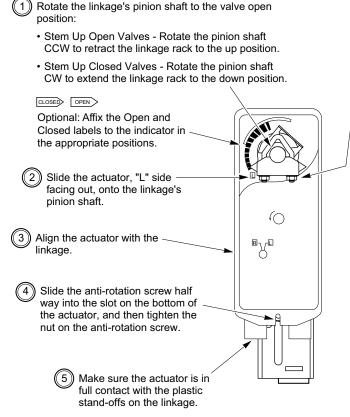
Mounting MX41-707X or MX41-715X and Setting up Actuator/Linkage/Valve Assembly.
